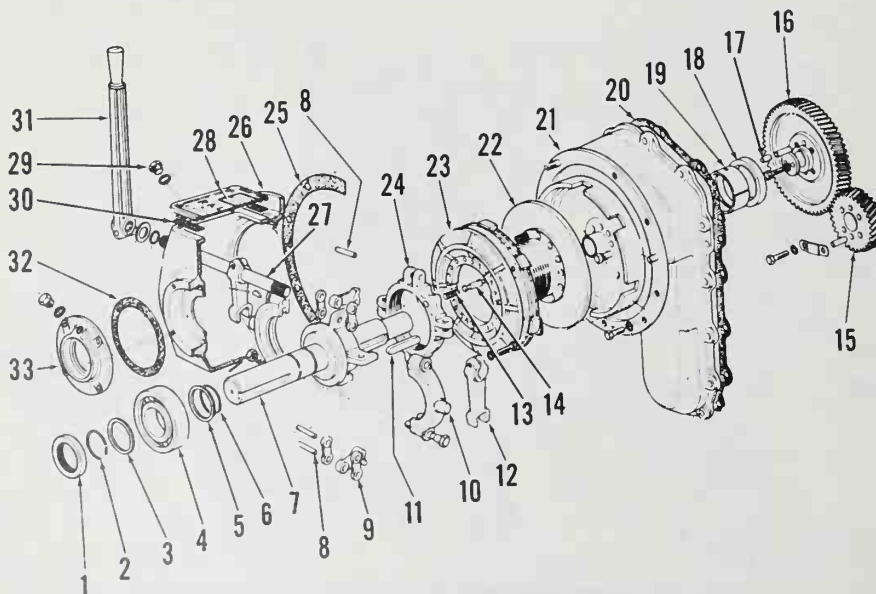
Exploded view of direct-drive clutch with 2:1 reduction gear used on HR engines.
